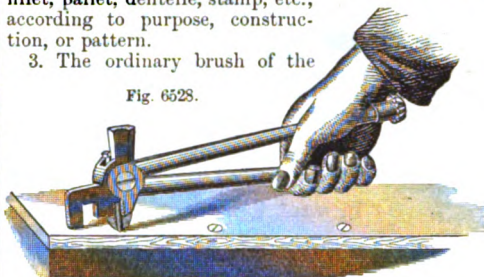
combines a hammer, nail-drawer, forceps, wrench, etc.
